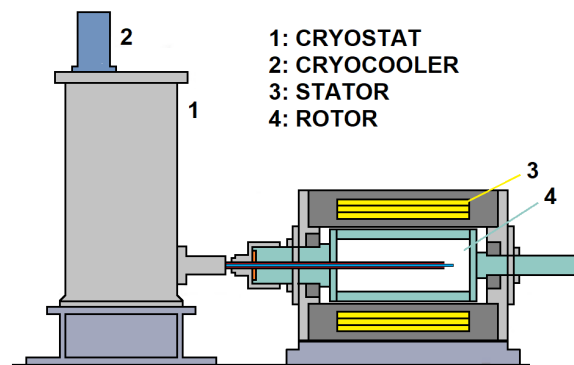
Electric machine with rotating cryostat for rotor cooling.
